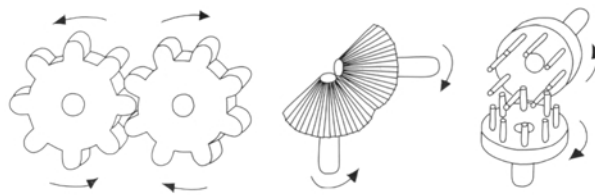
From left to right: spur gears which transmit rotation in a plane and bevel and pin wheel gears which change the plane of rotation.
